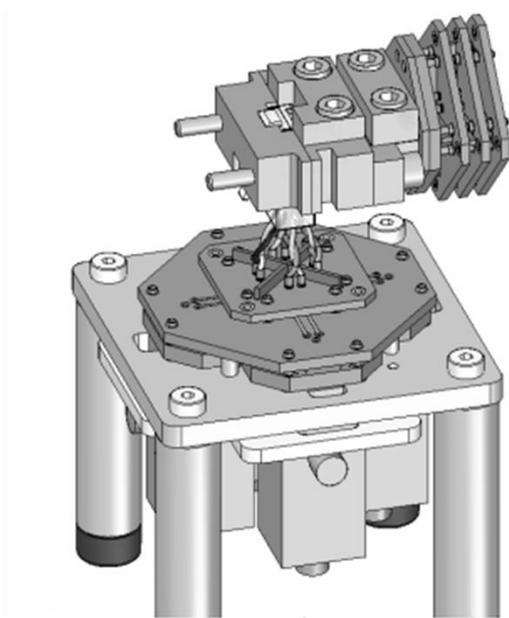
Example of a measurement setup for test plug NEXT loss
